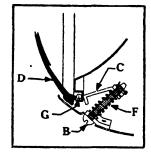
Section at bottom of headlight, showing Reflector Locking Screw "B" and Wedge "C" released, and in position to remove lens.
